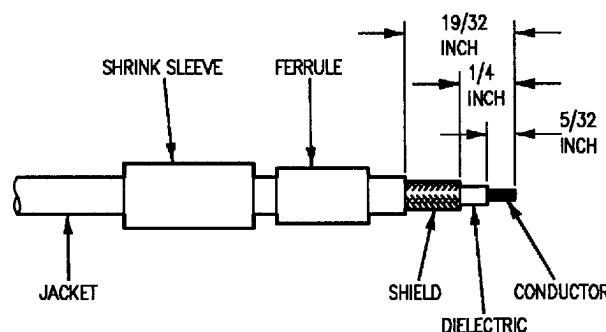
M39012/16-0503 Coaxial Connector Repair (Sheet 2)
